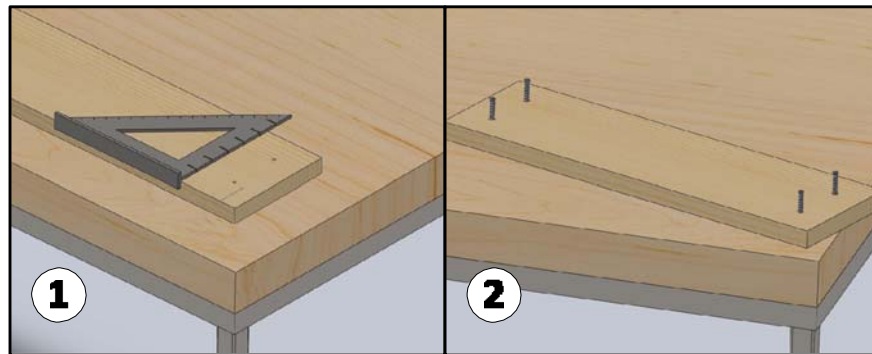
(1) Marking where the edge of the gusset sits. (2) Starting the screws in the back piece.
